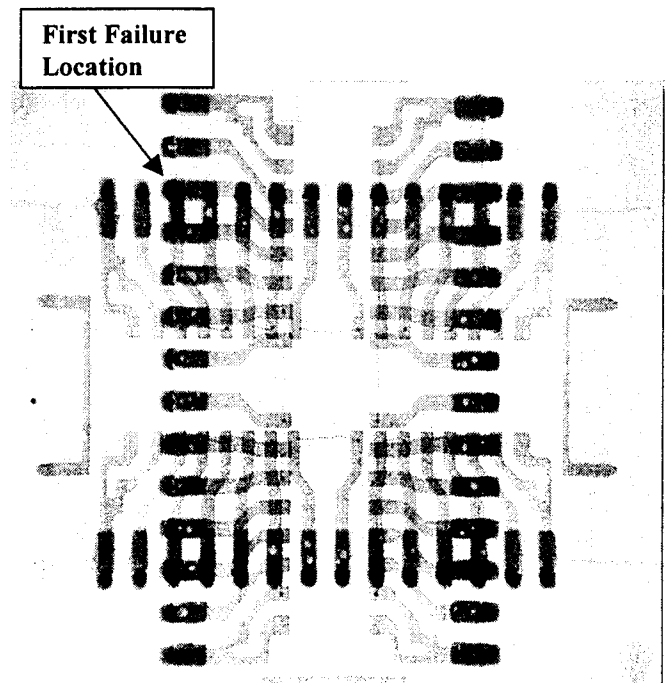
The Solder Joint First Failure in a Double Sided Assembly
